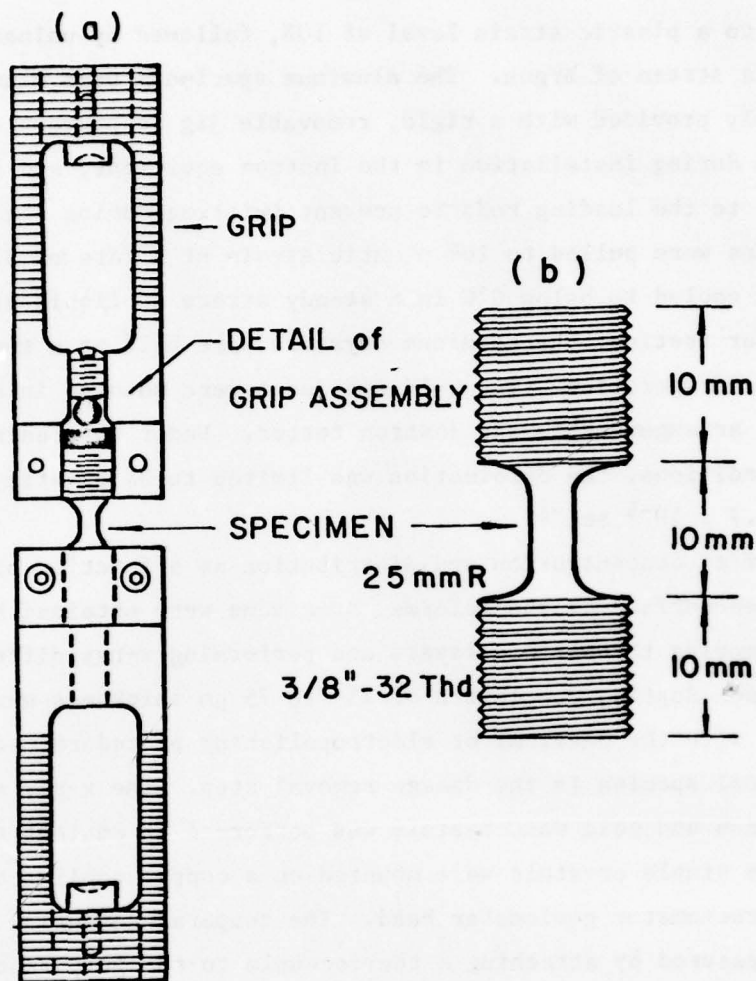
Specimen configuration and grip assembly employed in the fatigue investigations of Al single crystals and Al 2024 alloy: (a) specimen mounted in grips used for both static (tensile) tests with a ball-and-socket arrangement, and dynamic (push-pull fatigue) testing by clamping to a similarly serrated loading fixture; (b) cylindrical fatigue specimen - fabricated with 4.5 mm gage diameter for the single crystals, and 3.0 mm for the alloy specimens.
